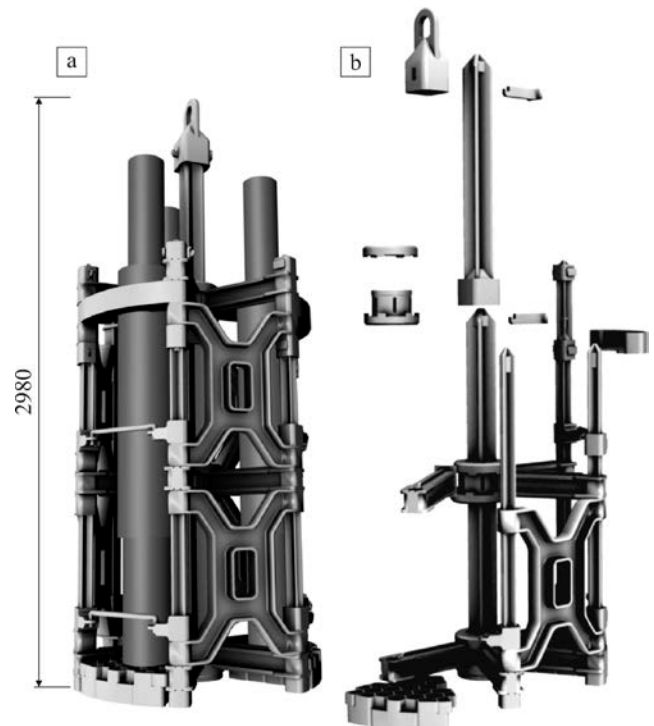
The equipment for the heat treatment of shafts of a wind turbine: a) general view [3, 9], b) single components
